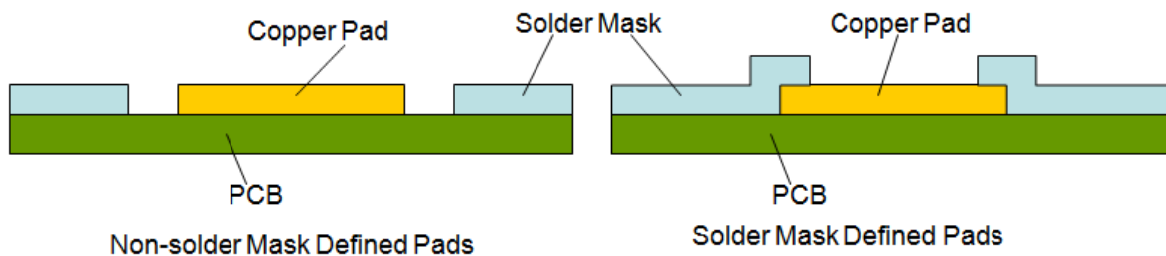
Cross-Section of Non-Solder Mask Defined (NSMD) and Solder Mask Defined (SMD) Land Patterns
